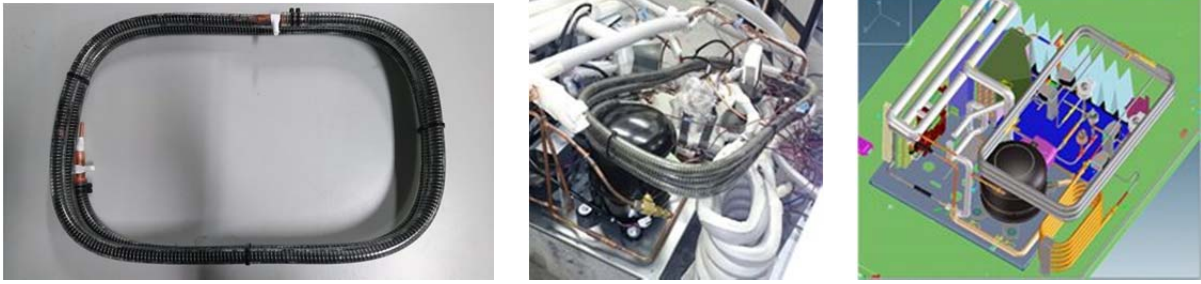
Photograph and 3D drawing of double tube type thermal storage tank for evaporation of CO₂.
